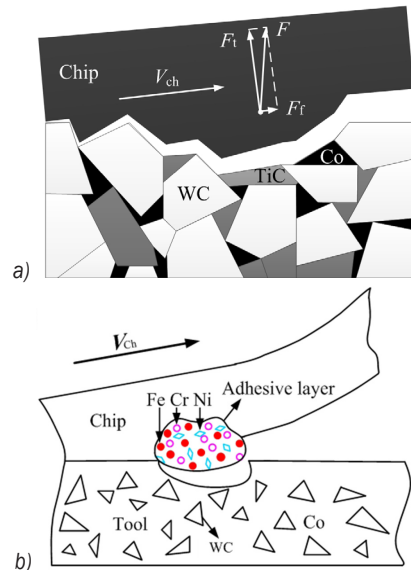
The adhesion layer is removed in the form of chips; a) forces of the cutting tool in the cutting process, and b) schematic diagram of the formation of tool-chip adhesion
